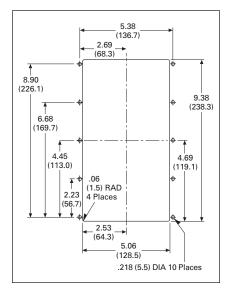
Drilling Pattern — Dimensions in Inches (mm)
